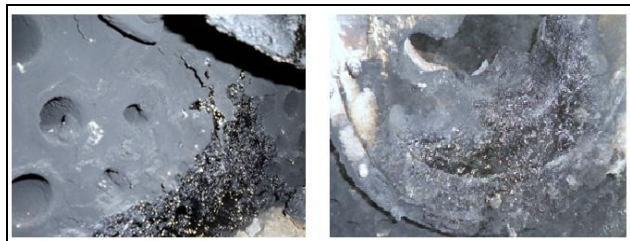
Hot corrosion aspect of a fire-tube boiler
